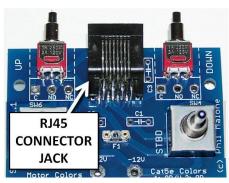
RJ45 Connector Jack Installed at Location J1
